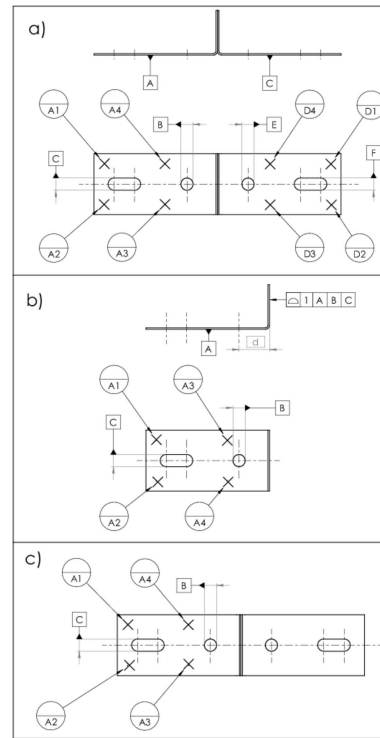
Datums reference frames for parts, assembly and measurement.
